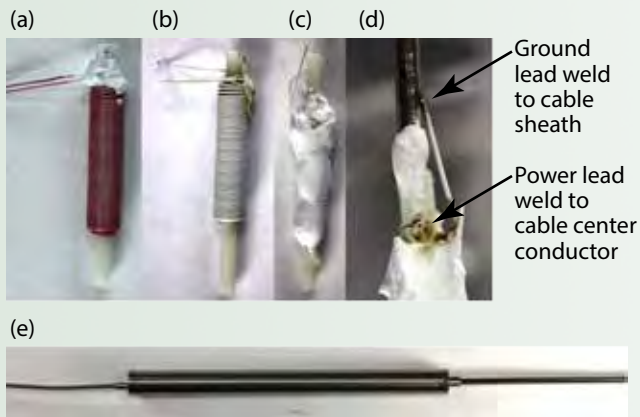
Magnetostrictive transducer fabrication. (a) Silver-palladium is wrapped around an alumina bobbin; (b) the wire is coated with a standoff insulator and heat treated; (c) the assembly is coated with alumina cement and heat-treated a second time; (d) a laser-welded coaxial cable is attached; and (e) the finished transducer is welded into a prefabricated housing.
